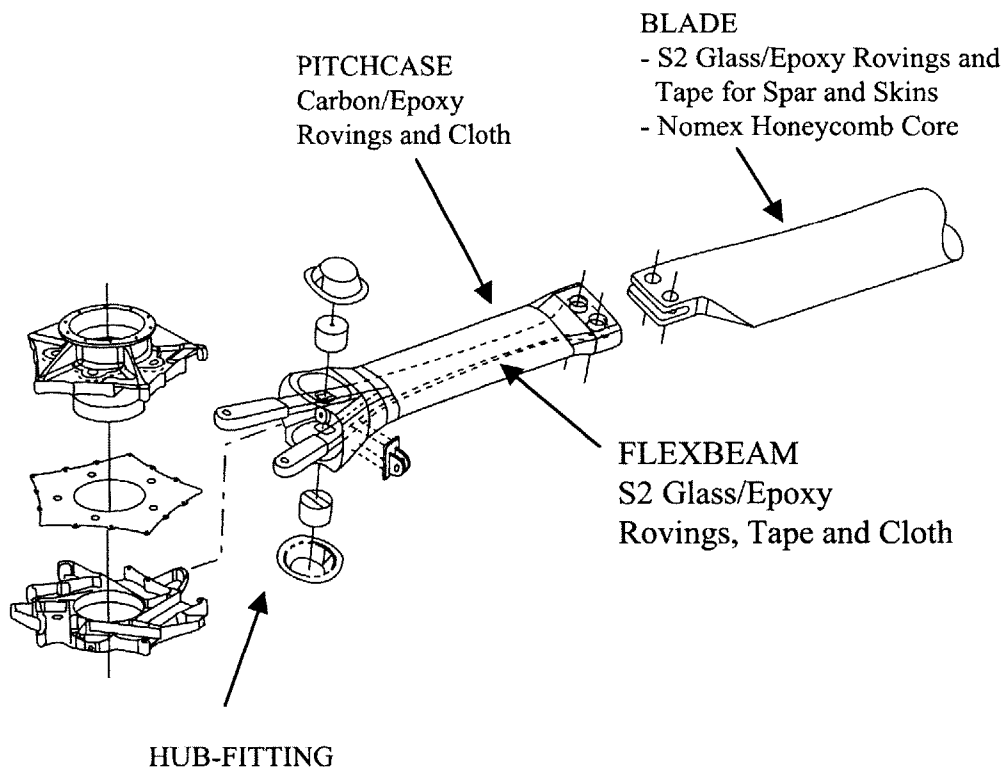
Diagram of bearingless and hingeless rotorhub assembly of MD900 Explorer [4].
